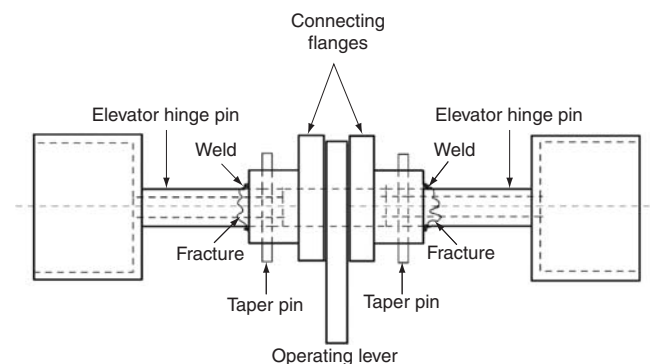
Schematic diagram of the elevator-hinge pin-connecting flange assembly
